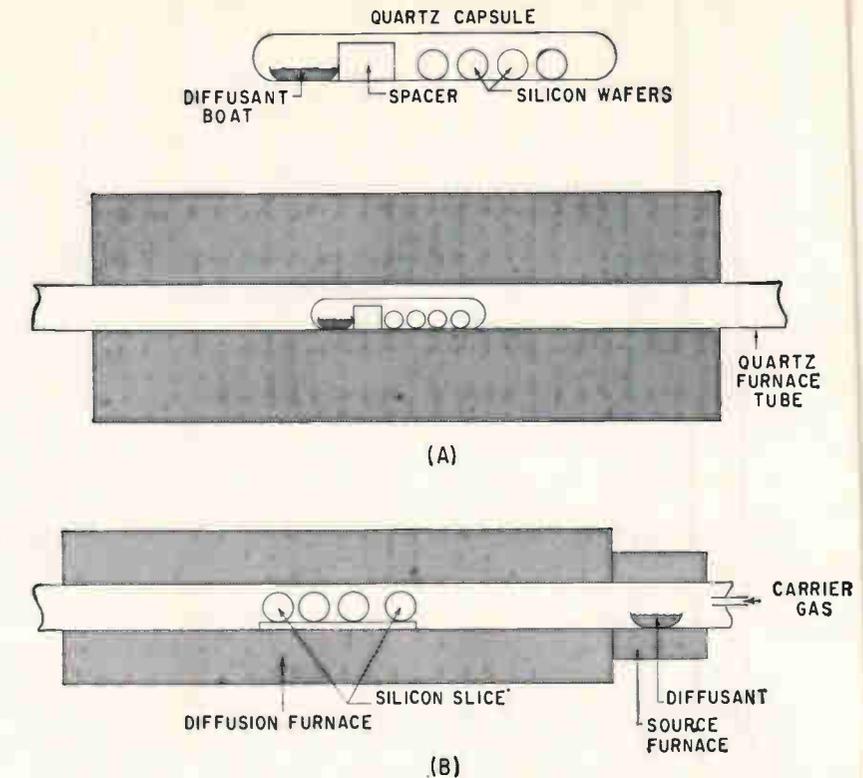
Diffusion equipment showing (A) closed-tube system and (B) open-tube system
